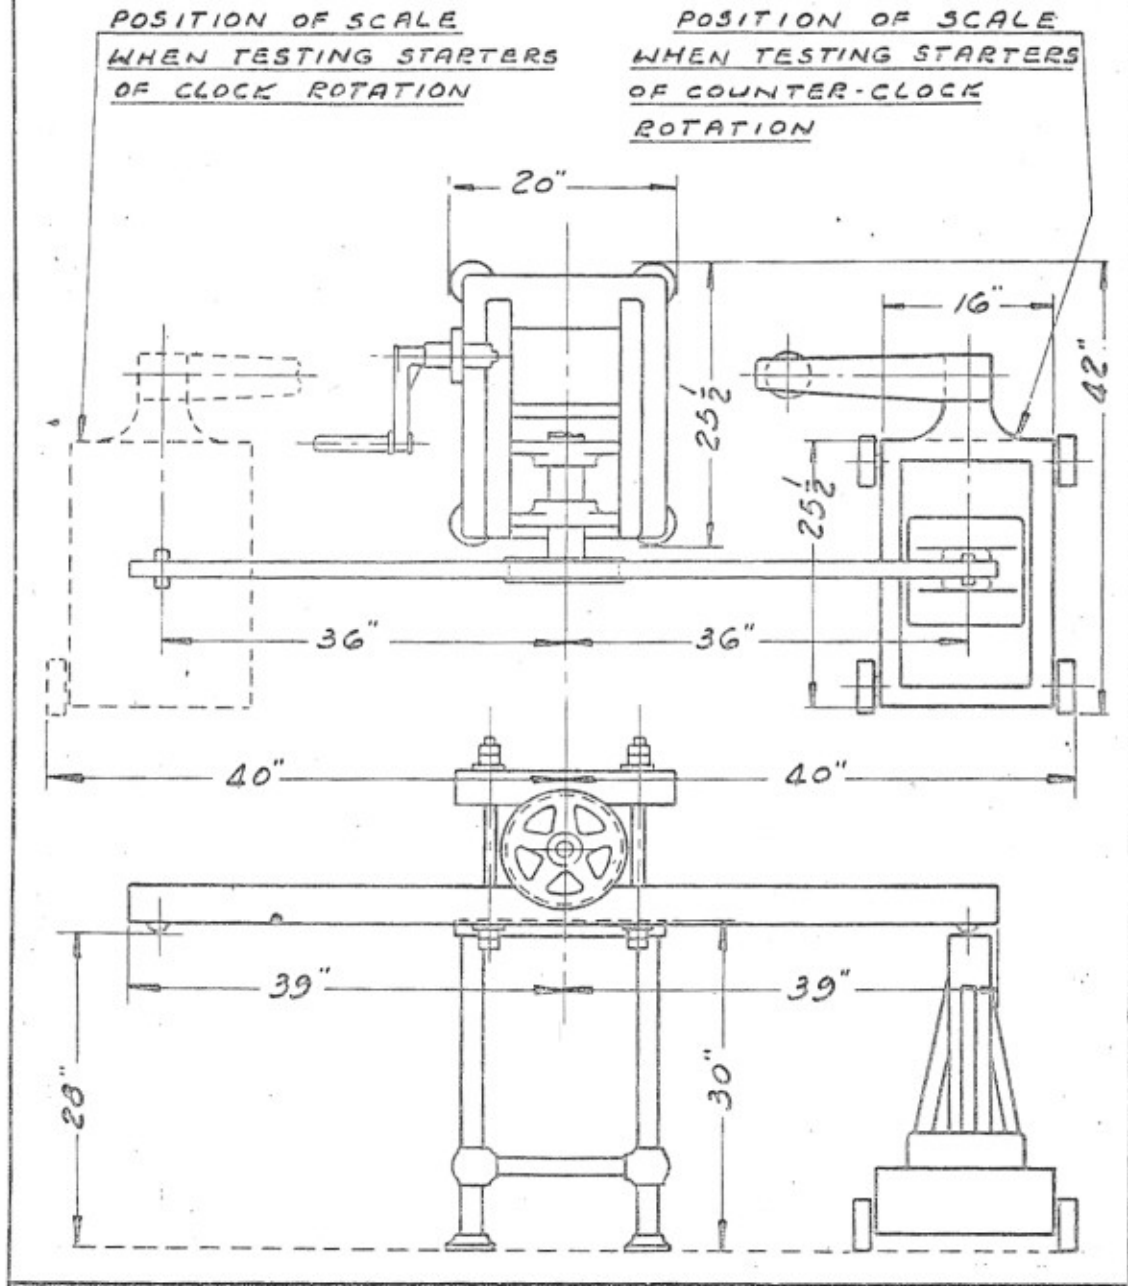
Schematic Diagram of Prony Brake Test Stand MT-327
